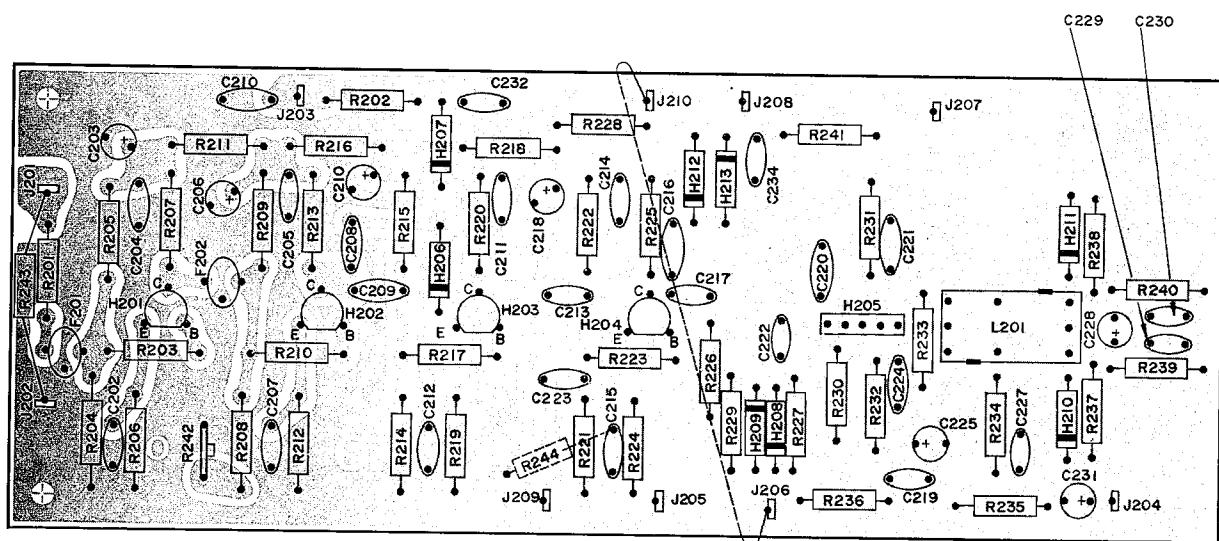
FM IF Amplifier and Detector Unit Assembly P200 Component Locations
